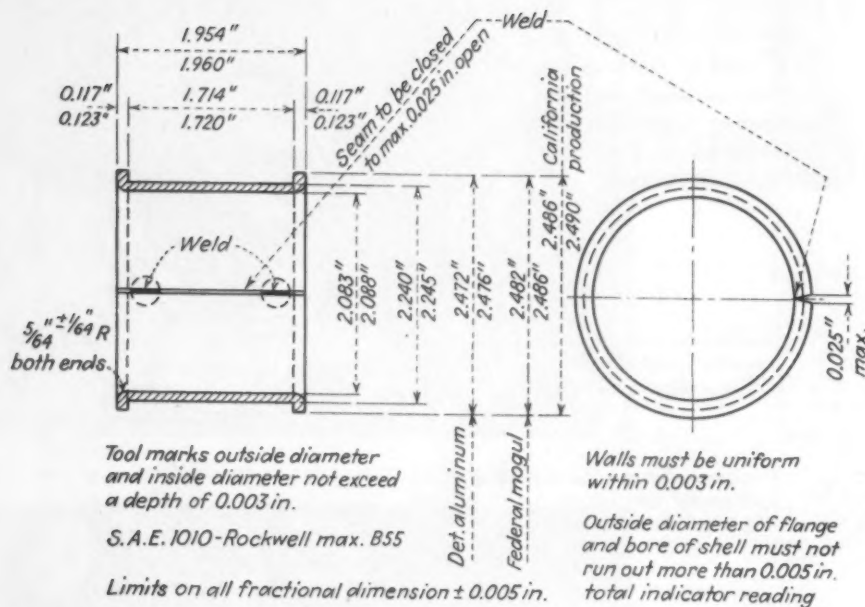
This connecting rod bearing is made up and spot welded with two spots, as indicated in the drawing. Later it is babbitted and cut into halves, giving two half-bearings.
